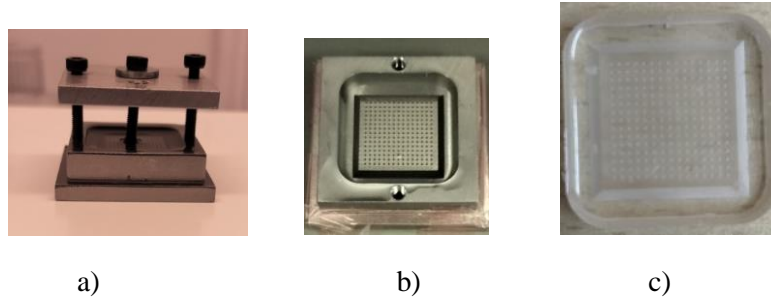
a) &b) Positive mold made of stainless steel, c) negative mold fabricated with PDMS
